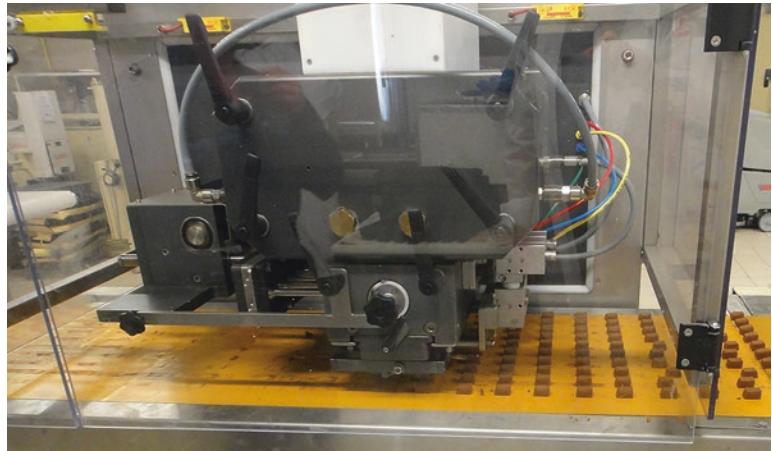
Cooling wheel for cooling caramel (Courtesy of R. Hohberger, SPEC Engineering)
